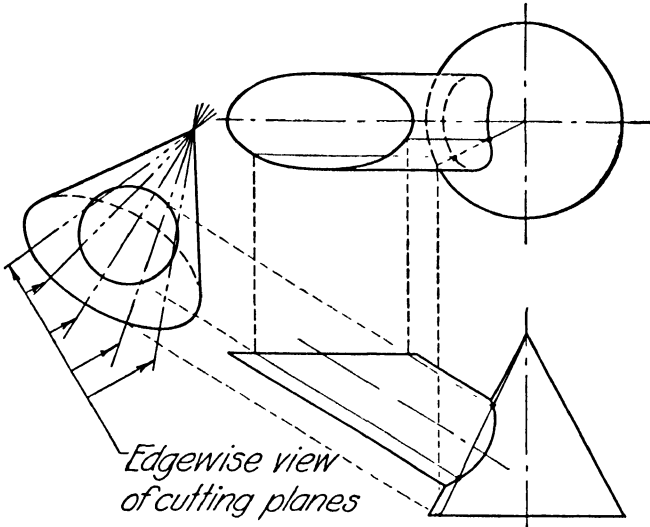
Auxiliary view used to obtain edgewise view of cutting planes.
